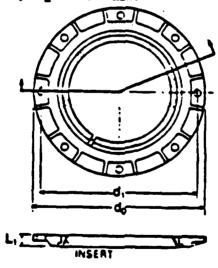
shows a schematic of a boiling tube. These were accurately held in place using Teflon inserts and sealed by Orings. A 4-stud strong-back secured the Teflon inserts inside the aluminum flanges.
